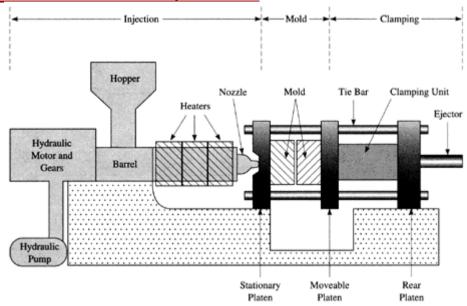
Injection molding machine showing three major functional units (injection, mold, and clamping) along with major components of each unit.
